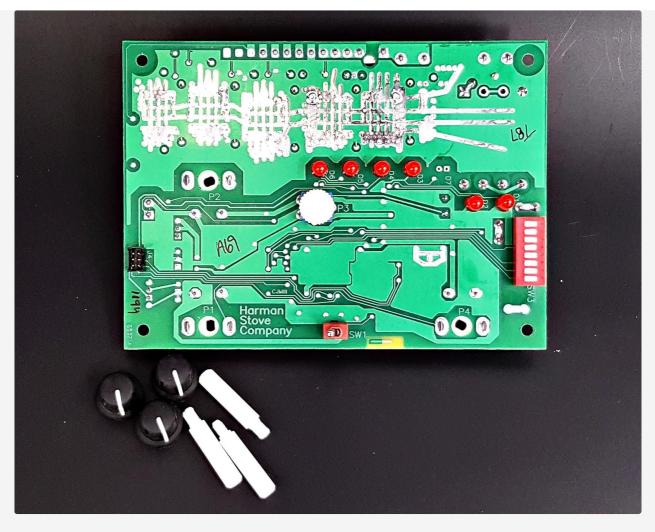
Rear view of the control board, illustrating the solder points and circuit traces. Note the SW3 DIP switch bank on the right side.
